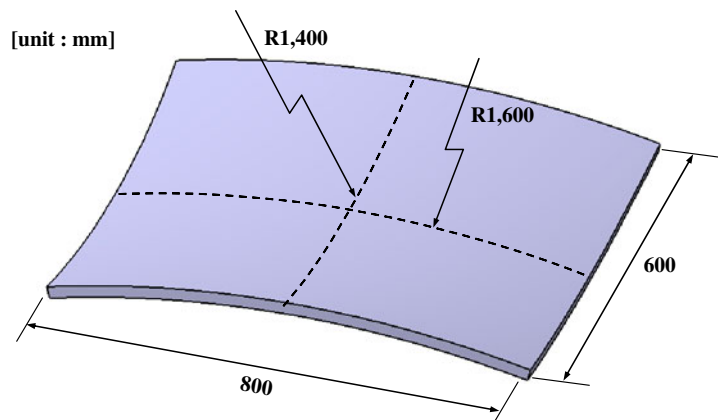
A saddle-type curved plate formed by the flexible forming machine (800 mm × 600 mm × 20 mm)
